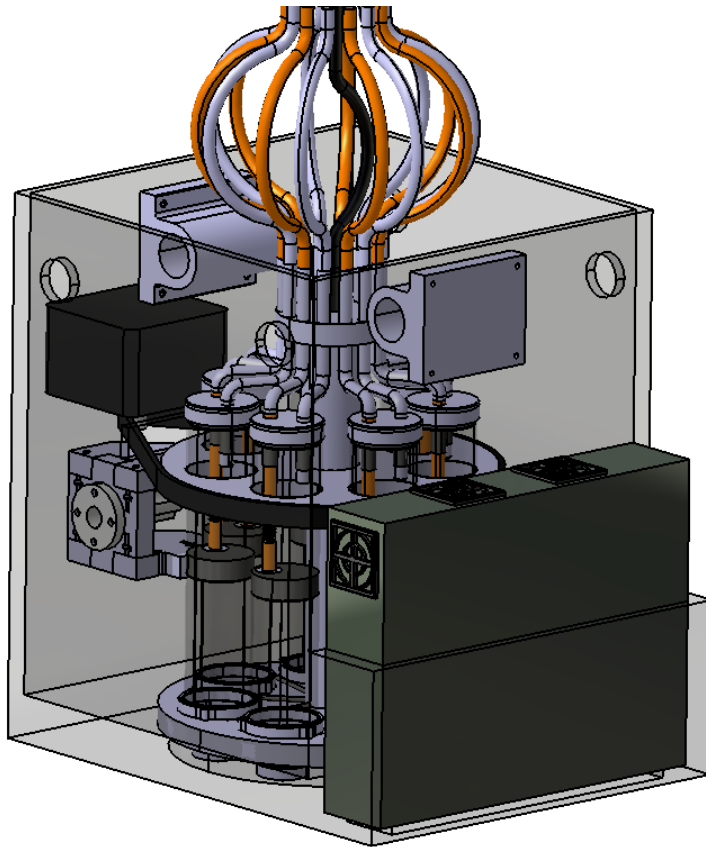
M²-3D Printer Nozzle Deposition System – Isometric View
